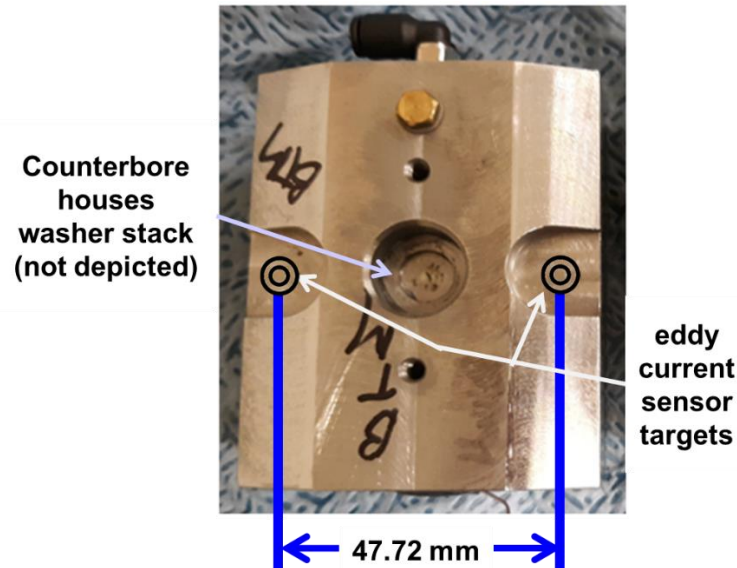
Photograph of a pad back surface showing counterbore to locate pivot support and locations of pad tilt displacement measurements.
